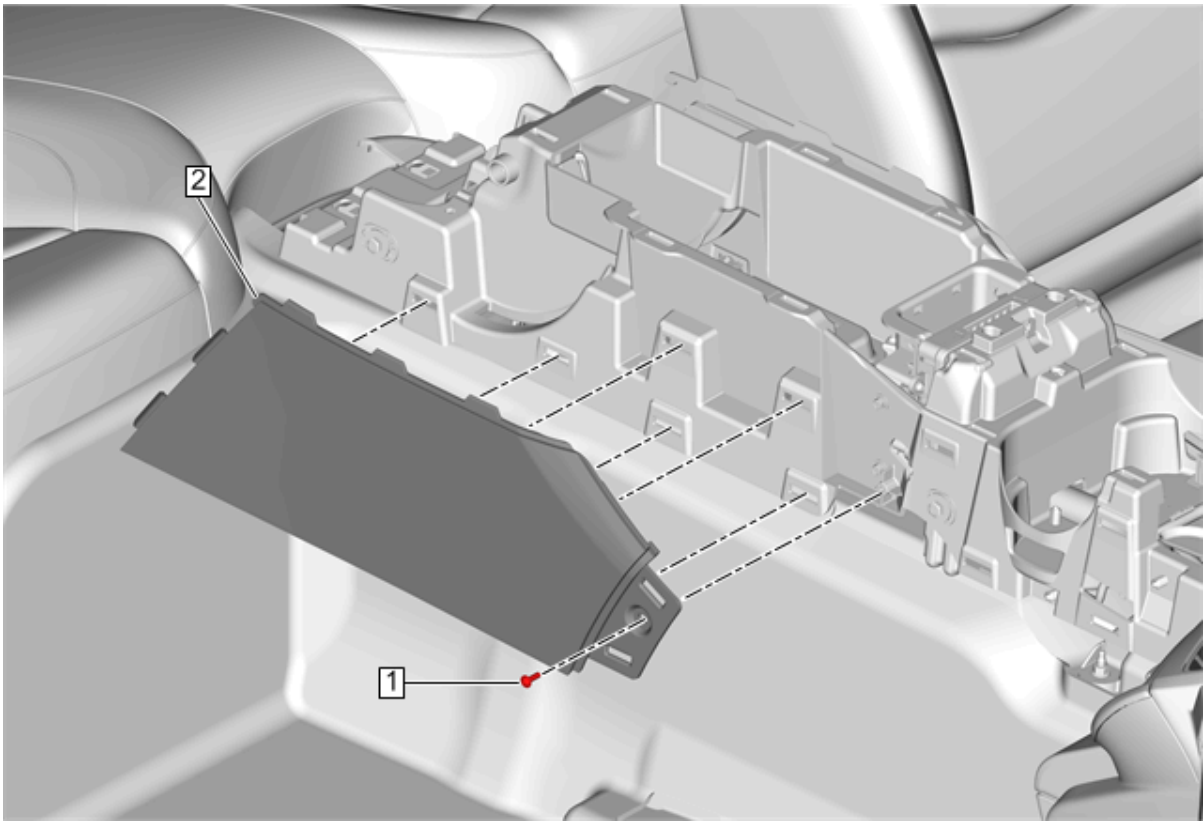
Front Floor Rear Console Side Trim Panel - Right Side
